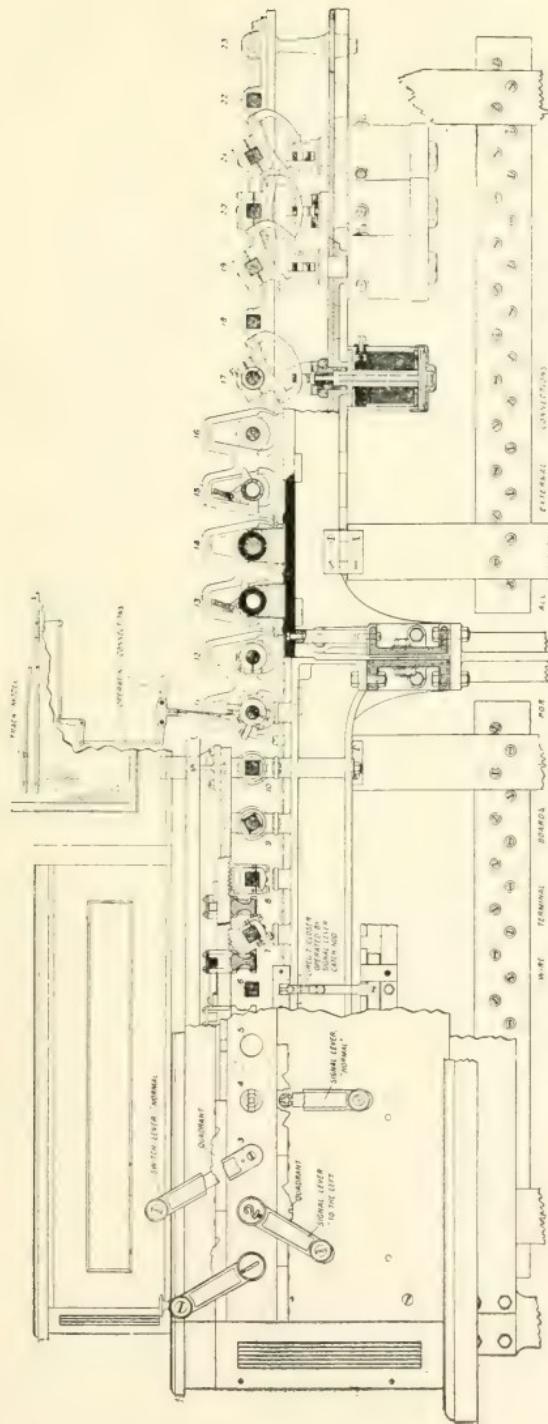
SECTIONAL VIEW OF ELECTRO-PNEUMATIC INTERLOCKING MACHINE
